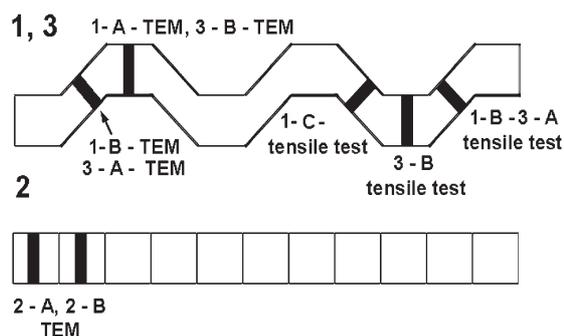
Shapes of the 3 plate specimens and locations of TEM and tensile test samples.
